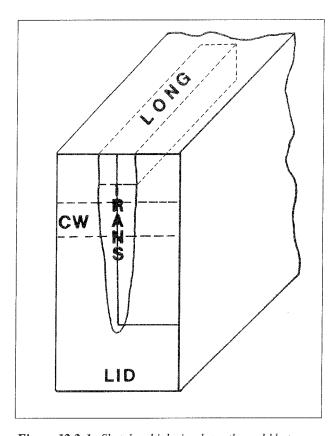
Sketch, which simulates the weld between the lid and the cylinder of the canister, showing how cross-weld (CW), longitudinal and transverse specimens were removed for creep testing.
